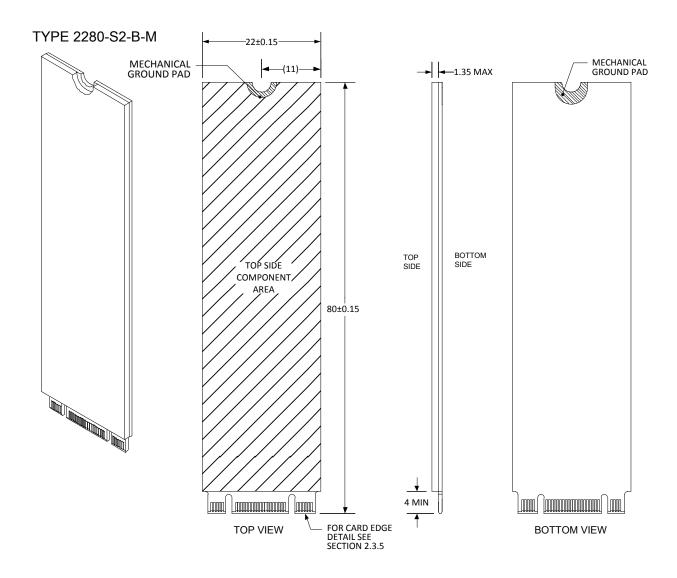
M.2 Type 2280-S2 Mechanical Outline Drawing Example
